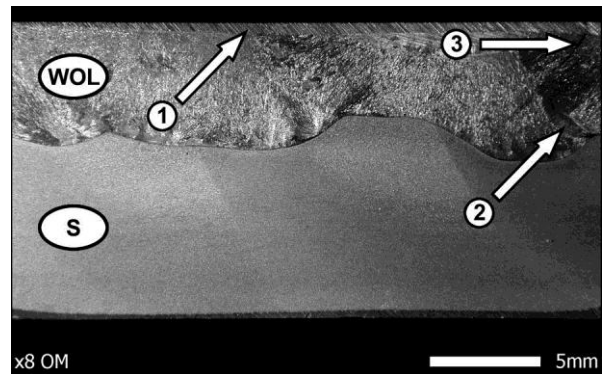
Macroscopic image of the EL-Hard 61 weld overlay layer. Grinding marks (1), macro-cracks (2) and (3) are revealed.
